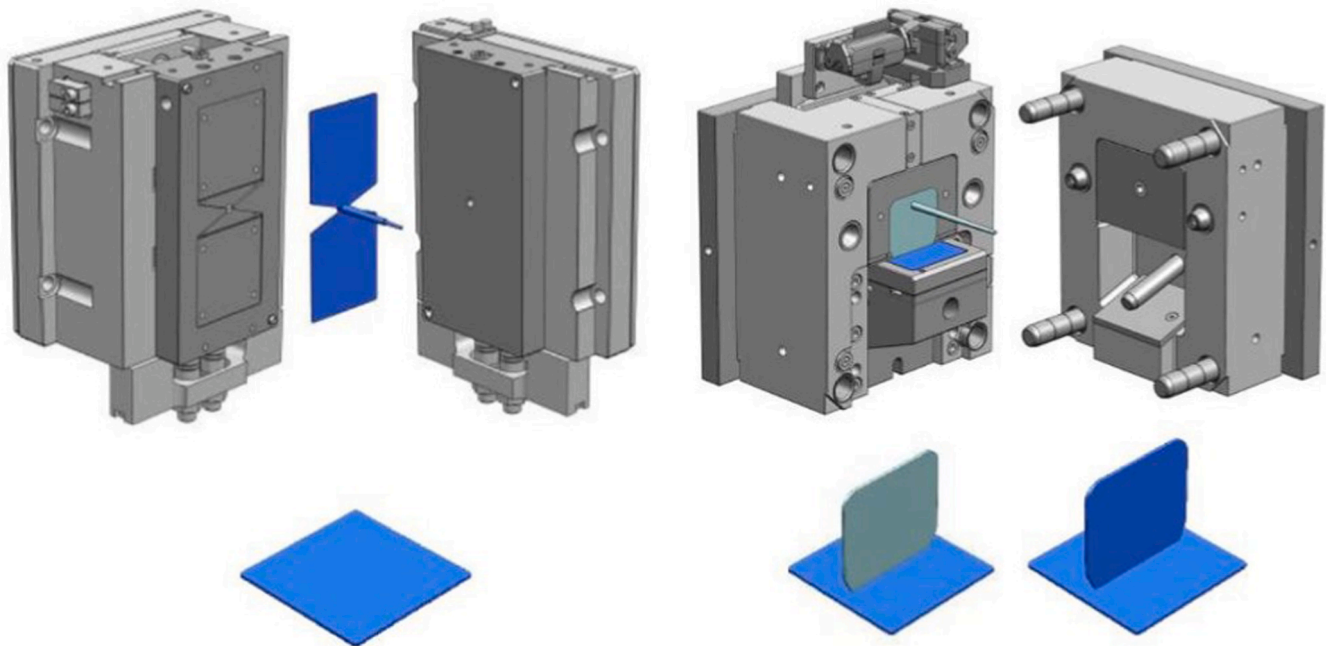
(a) A two-cavity cold-runner mold for the production of base plates and (b) an injection mold for the production of T-shape test specimens (an overmolded and a single-piece specimen).
